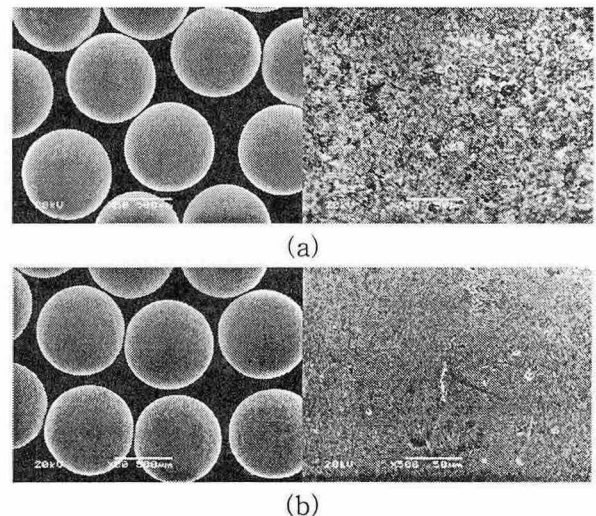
The shape and surface of solderballs for laser soldering (a) Sn-37Pb (b) Sn-3Ag-0.5Cu
